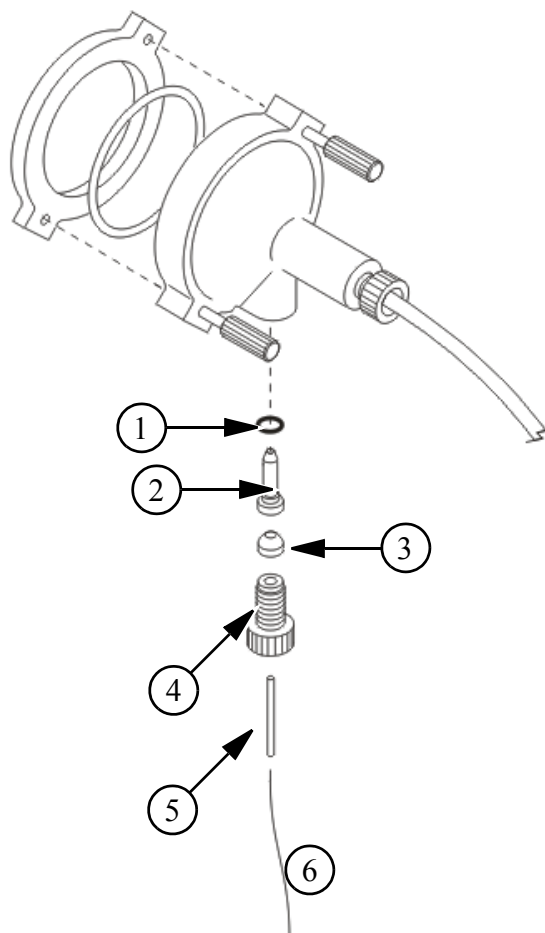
Clear GemTip for sample inlet and associated parts for Cross-Flow End Cap, Part No. N0780546.
